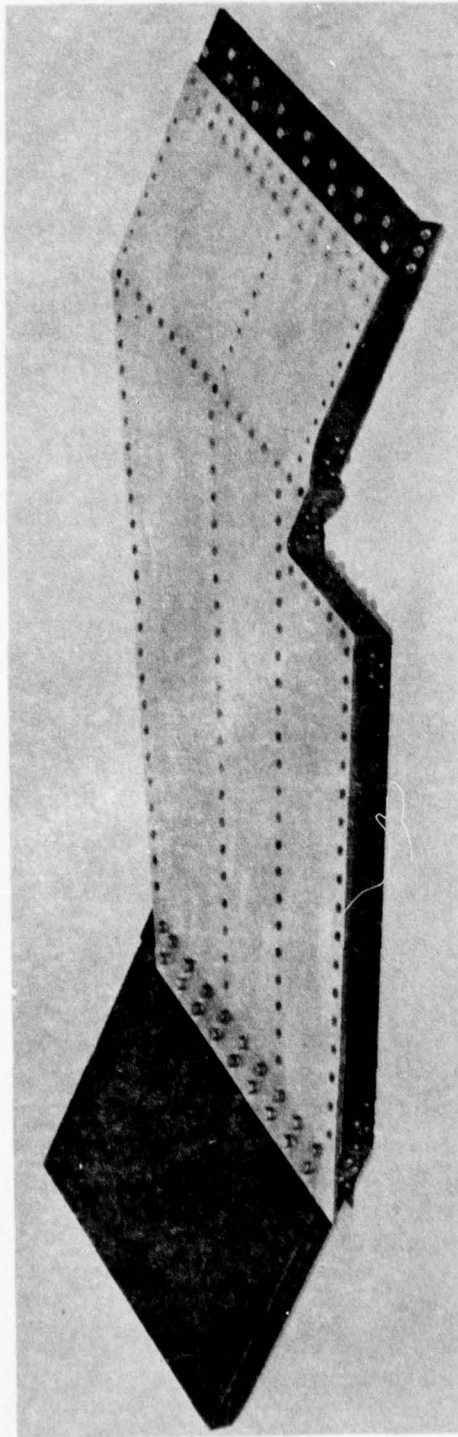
W B/AI WING SUBCOMPONENT FINAL ASSEMBLY
